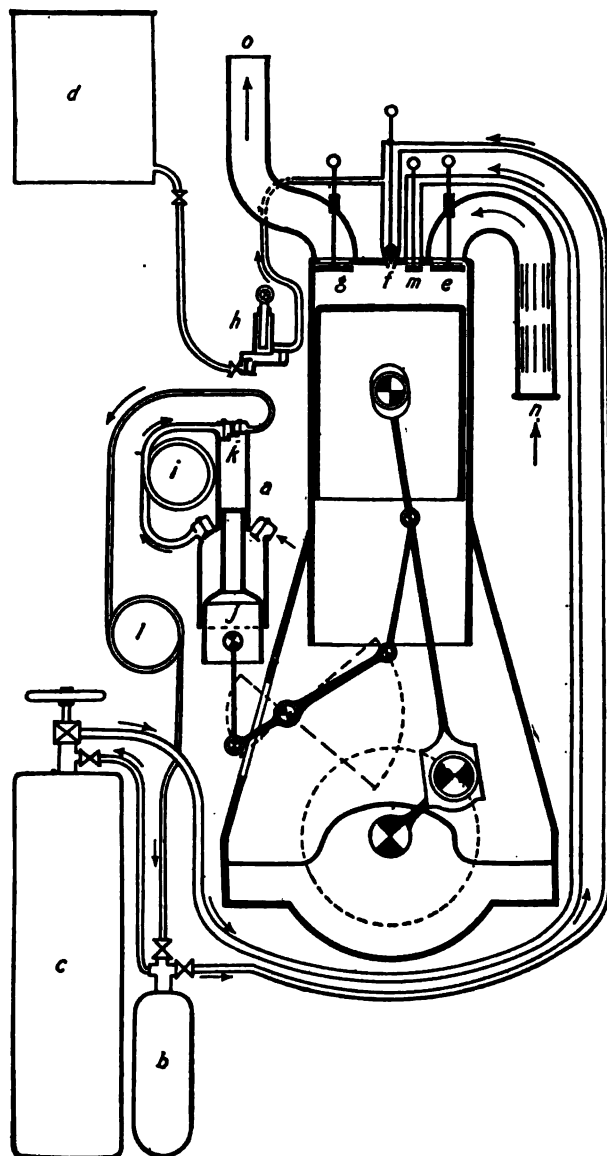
SEC. 10L.—Diesel engine having a four stroke cycle. *a*, air compressor; *b*, injection air bottle; *c*, reserve air receiver; *d*, fuel tank; *e*, air (intake) valves; *f*, fuel injection valve; *g*, exhaust valve; *h*, fuel pump; *i*, intercooler; *j*, low-pressure cylinder; *k*, high-pressure cylinder; *l*, aftercooler; *m*, starting valve; *n*, air intake; *o*, exhaust. From Bureau U. S. Mines Bulletin No. 156.
